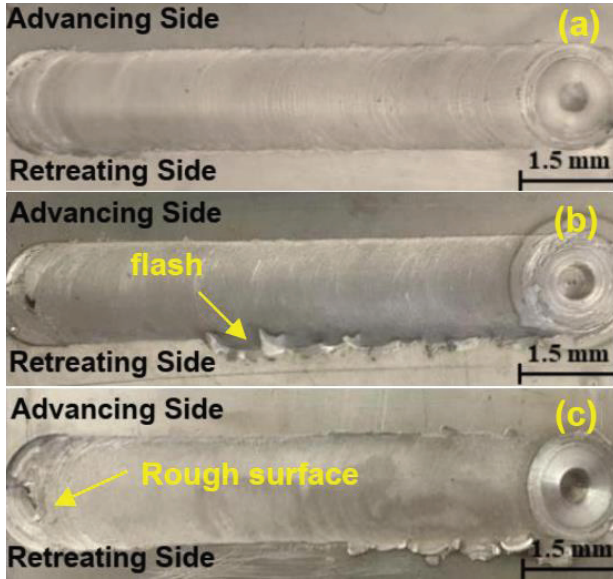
Characteristics of welding from top view surface using a triangular tool pin at rotation speed 2000 rpm and welding speed: (a) 80, (b) 112 and (c) 160 mm/min
